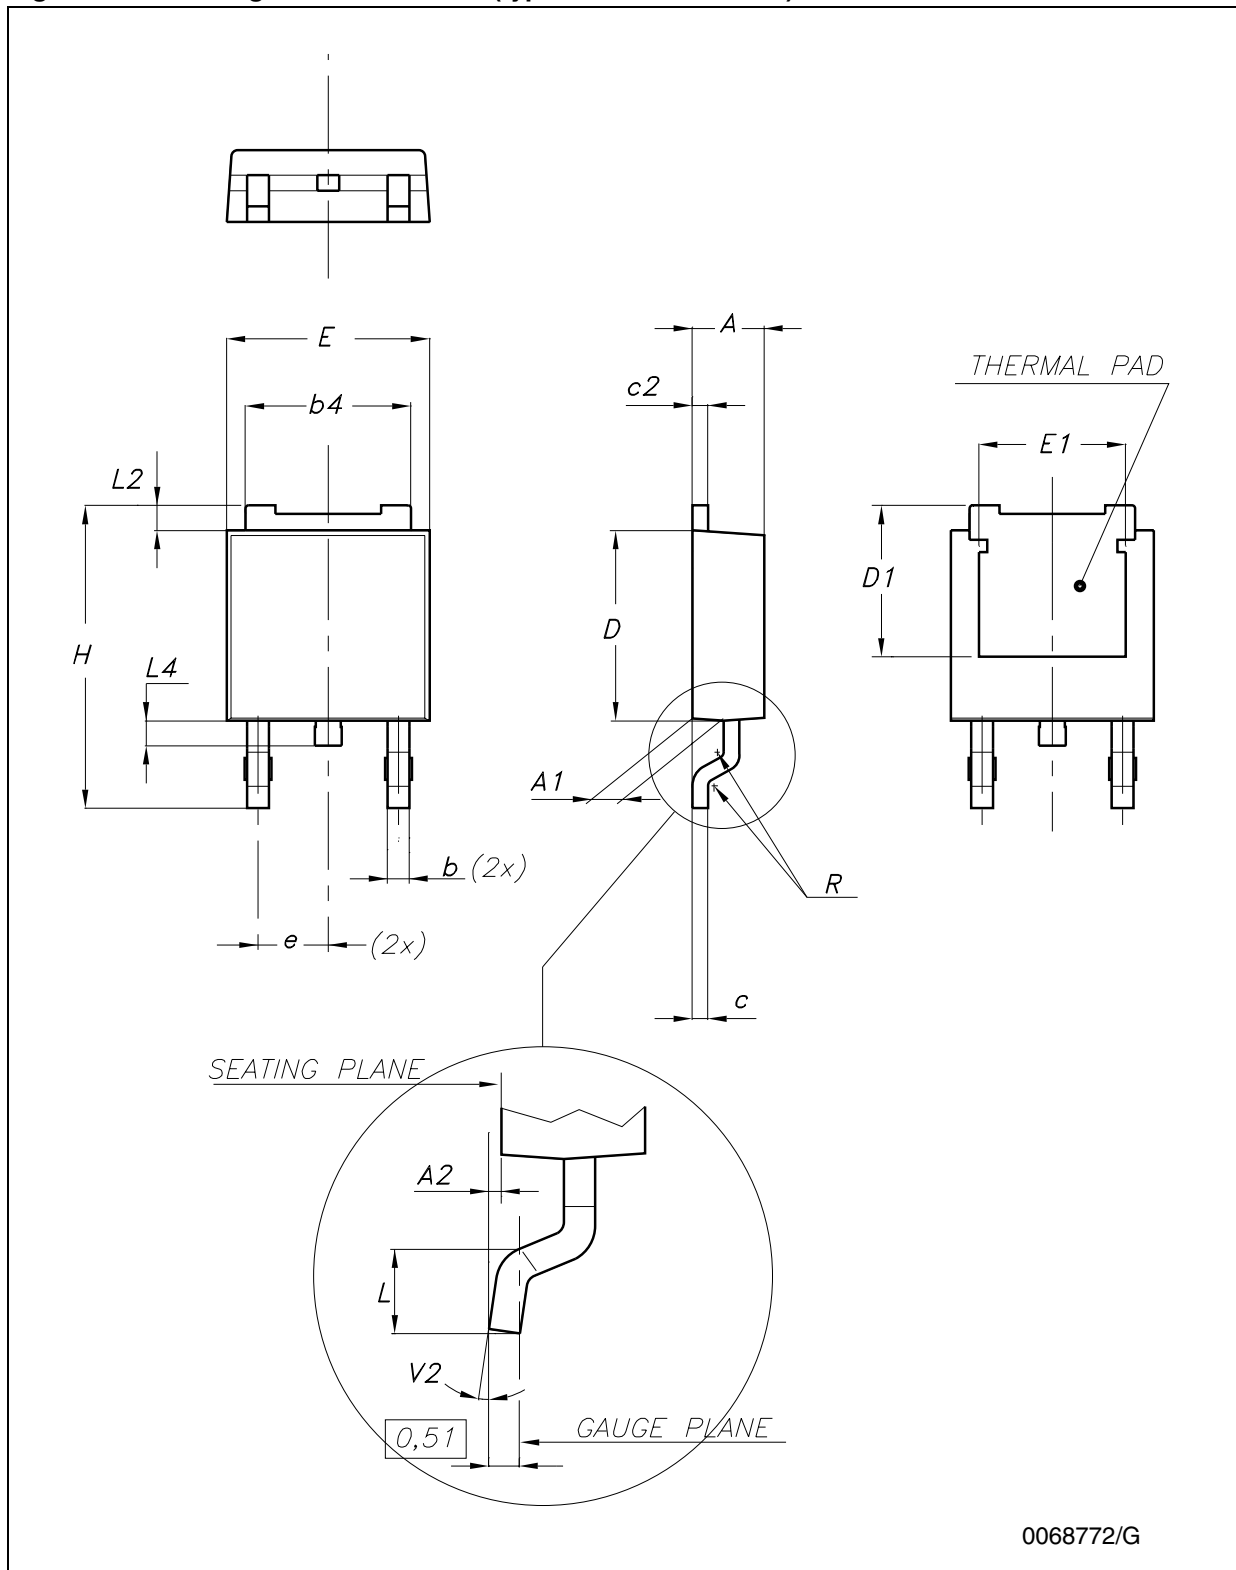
Drawing dimension DPAK (type IDS-subcon.)
